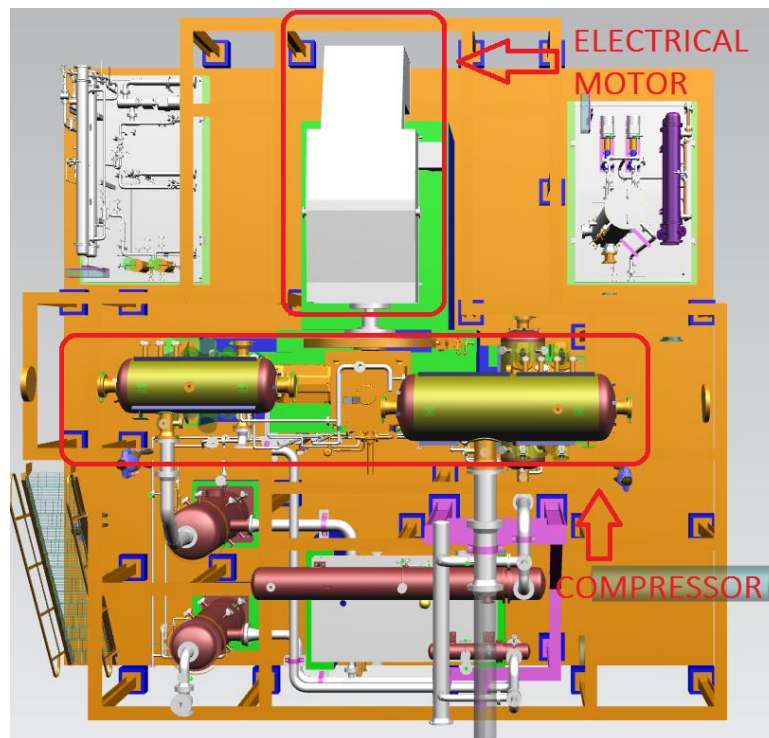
Layout arrangement – Reciprocating machine, Compressor – Top View
